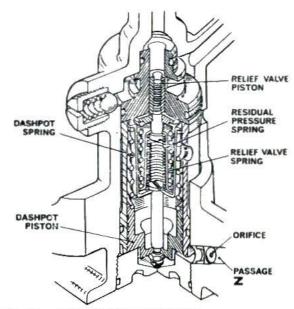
RELIEF VALVE AND DASHPOT ASSEMBLY
